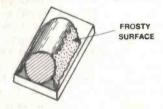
A 'cold' joint. The solder surface has a frosty appearance but looks good otherwise.
